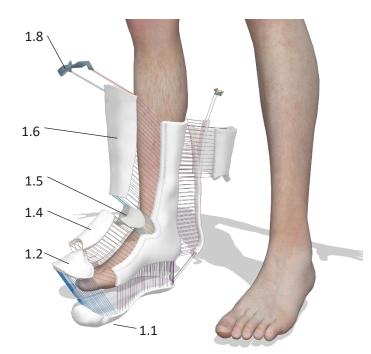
Explode 3/4 and back view Software: Marvelous designer.
